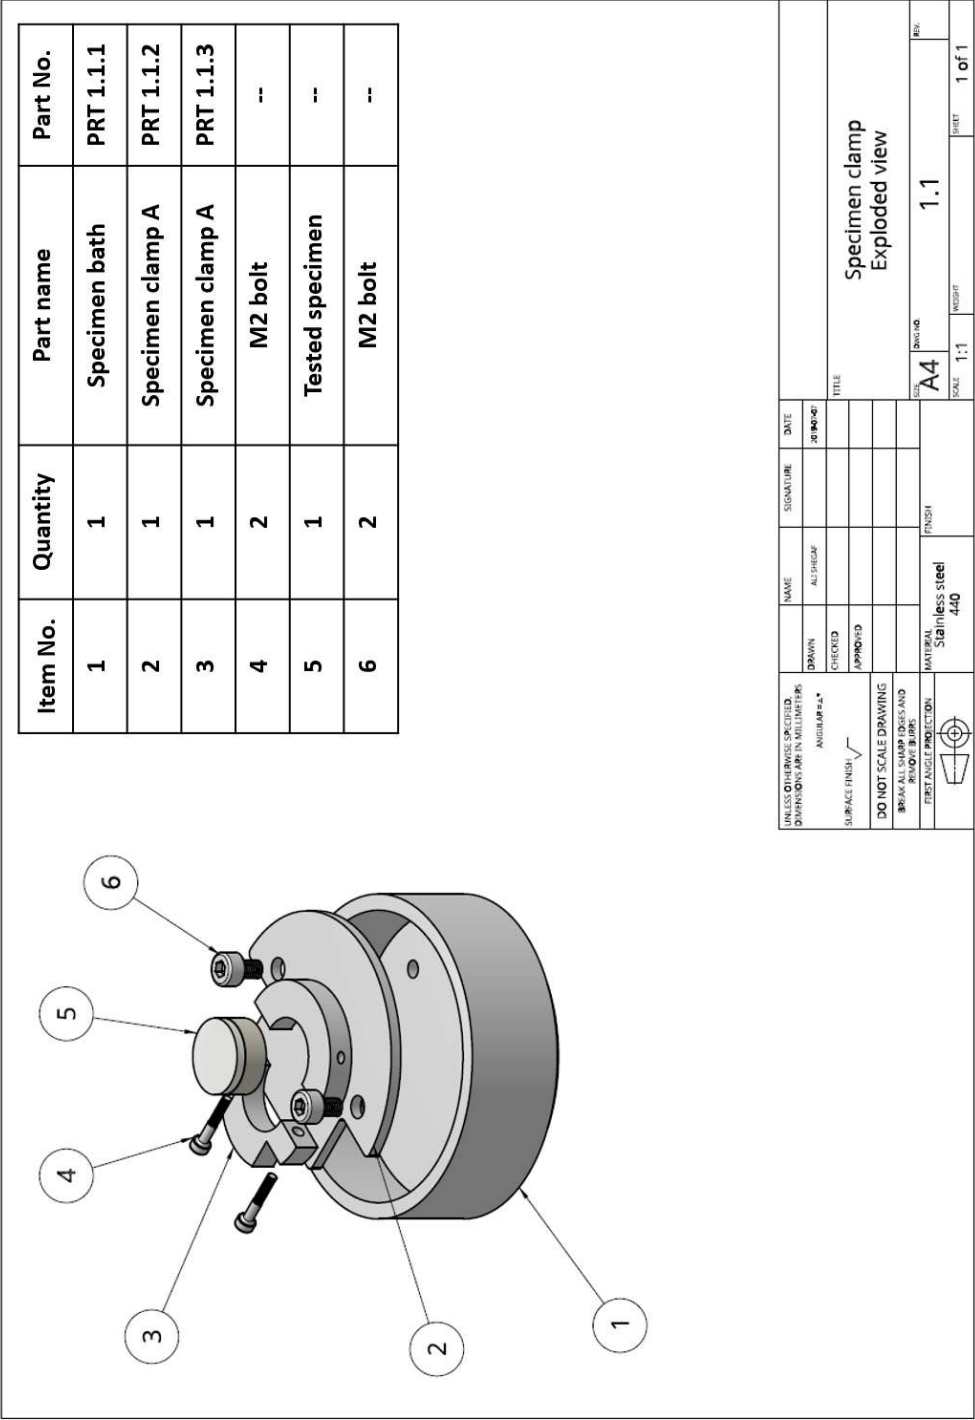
Exploded view of the specimen bath and clamping mechanism section.
